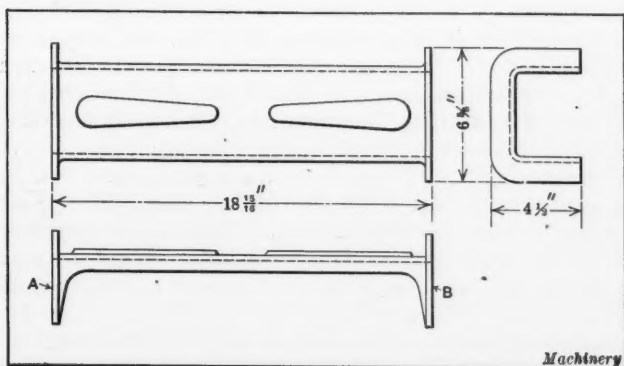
Casting held in Fixture shown in Fig. 5 when milling Ends A and B
